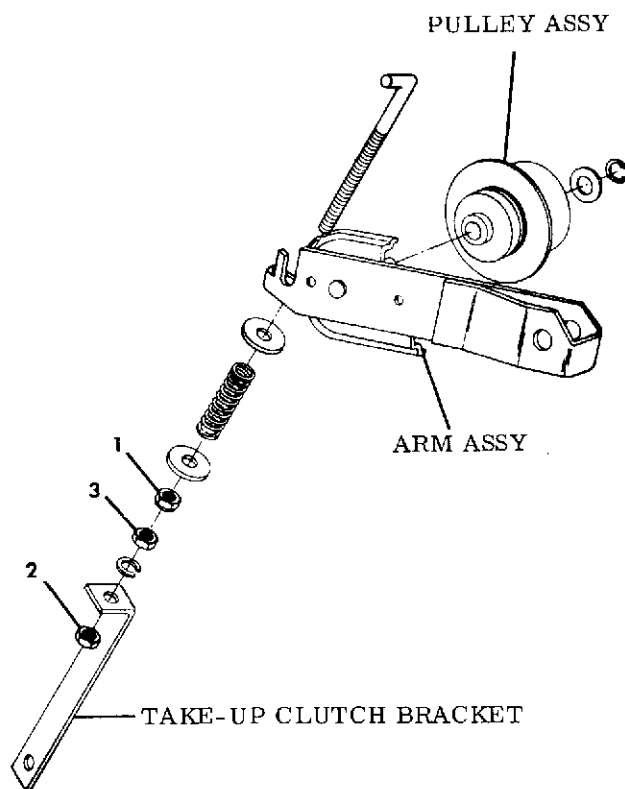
TAKE-UP CLUTCH ARM COMPLETE
